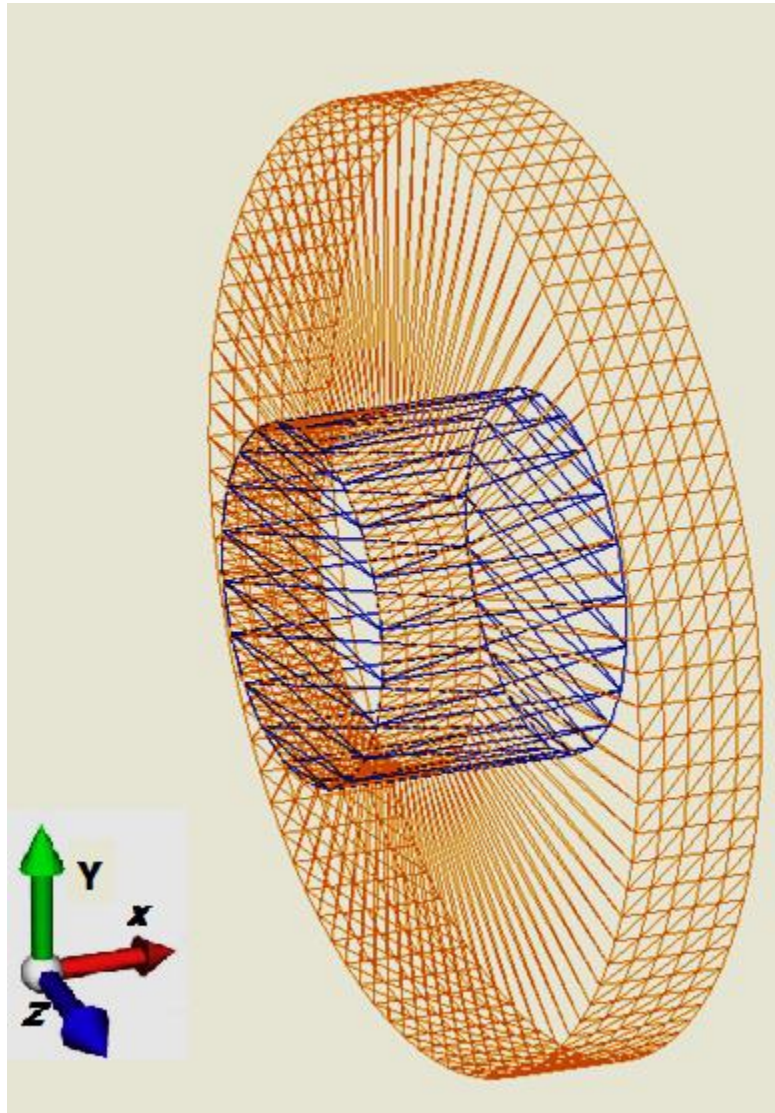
Cylindrical part being machined with STL geometry displayed
